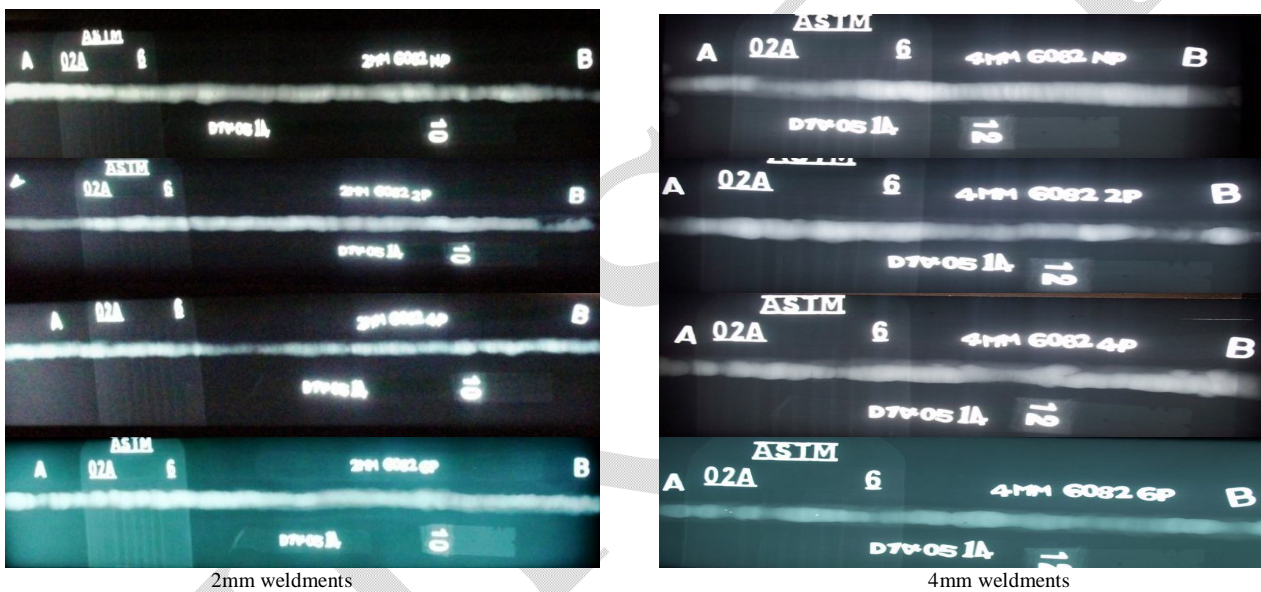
X-ray images of AA6082-T6 Weldments
